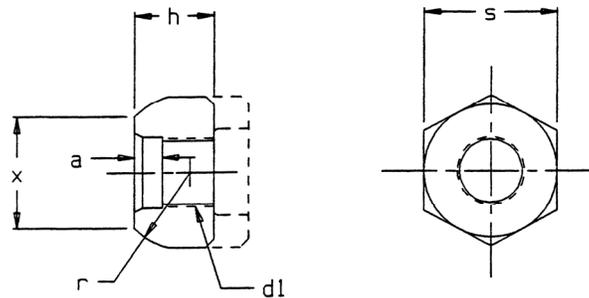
SINGLE OR OUTER DUAL BALL SEAT NUT FOR FERROUS WHEELS
